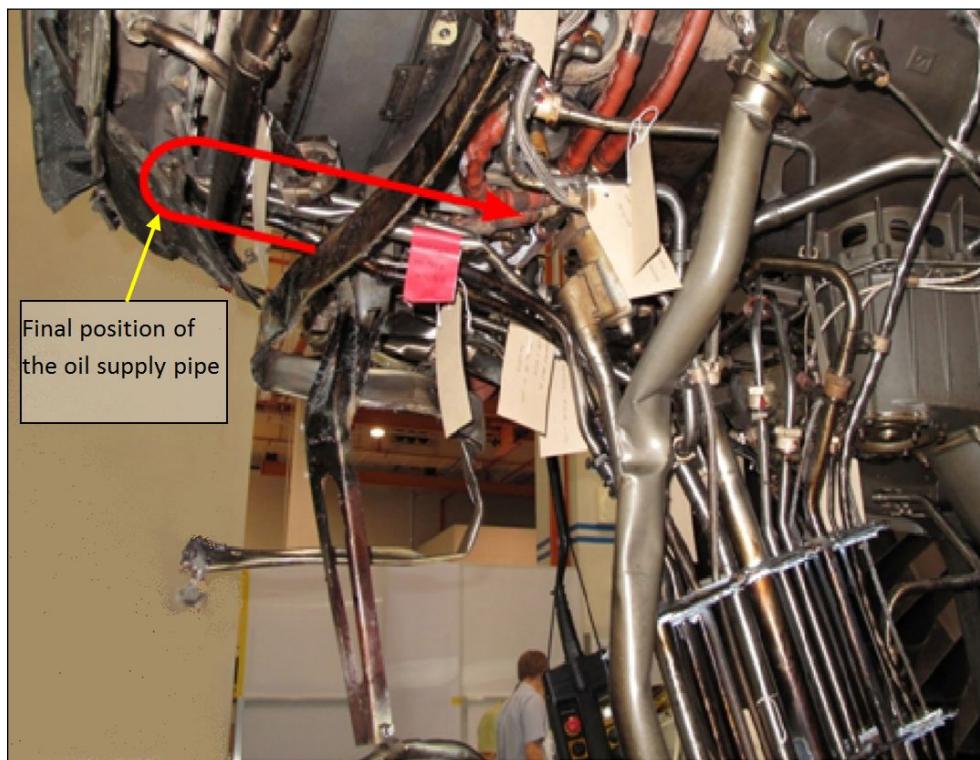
Left thrust reverser section (looking at the lower surface of the engine)
